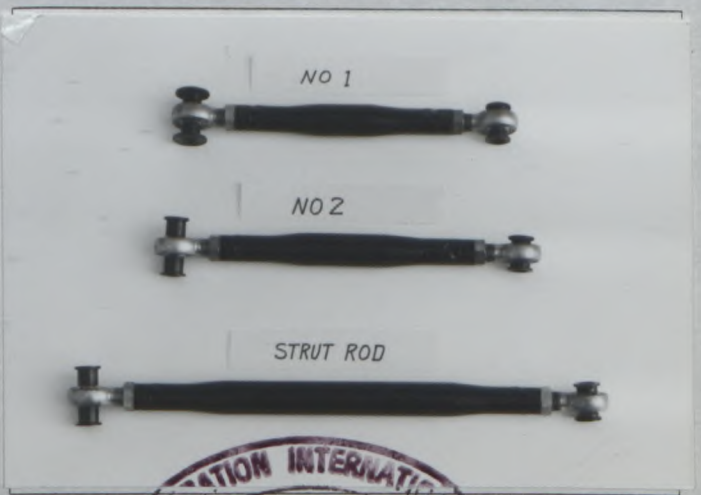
REINFORCED SUSPENSION ARMS No. 1 & No. 2 AND STRUT ROD, TYPE C
